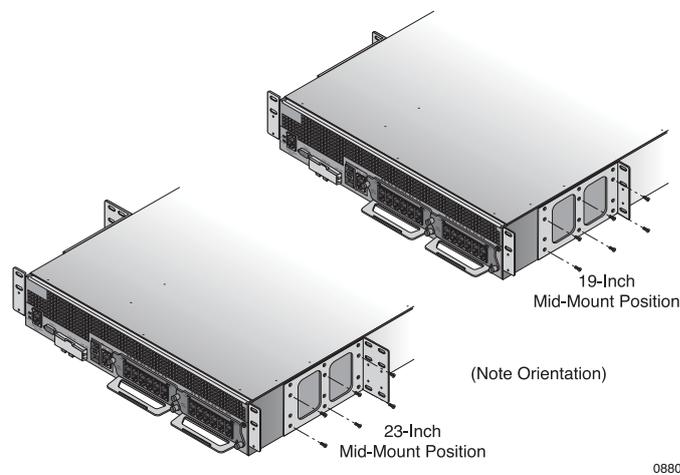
Installing Chassis Brackets for Mid-Mount Position
